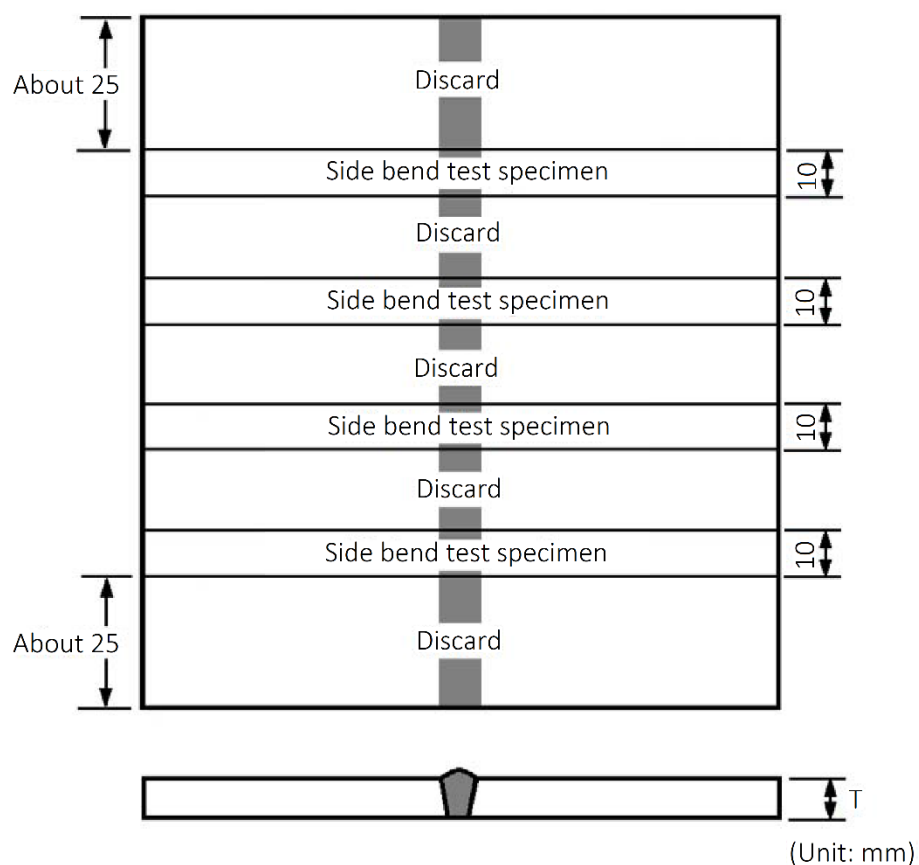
Dimensions and types of test assembly for butt welds ($T \geq 12$ mm)
